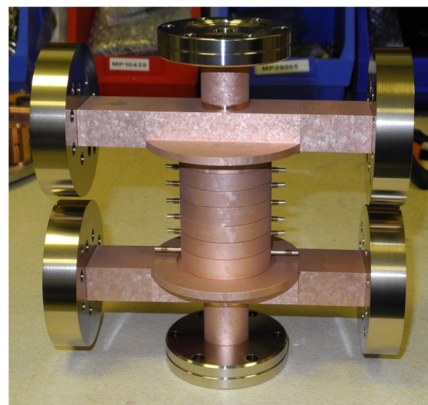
CLIC crab cavity prototype manufactured by Shakespeare Engineering.
